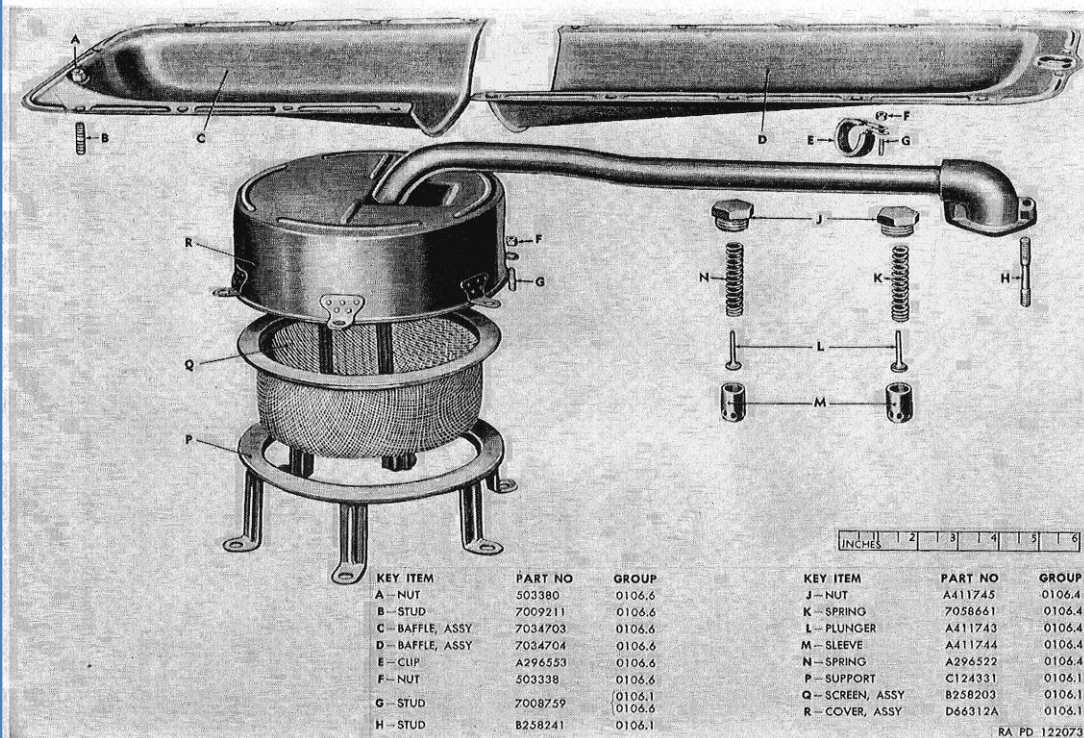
Enigne oil screen, baffles and relief valves, early type, exploded view.
